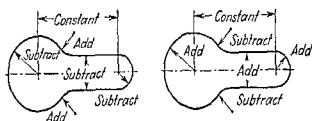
Clearance location related to part, punch and die dimensions: (A) Slug is desired part; (B) slug is scrap.
